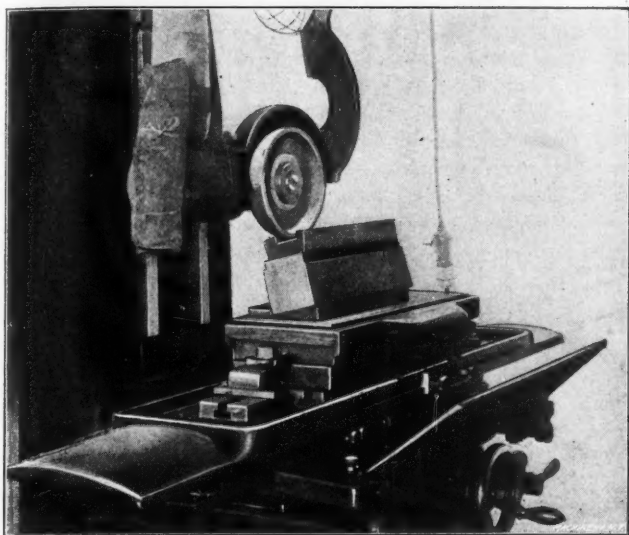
Grinding the Tapered Side of the Locking Bolt Blocks
